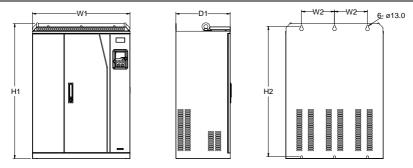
Wall mounting for 380V 220-315kW VFD models
